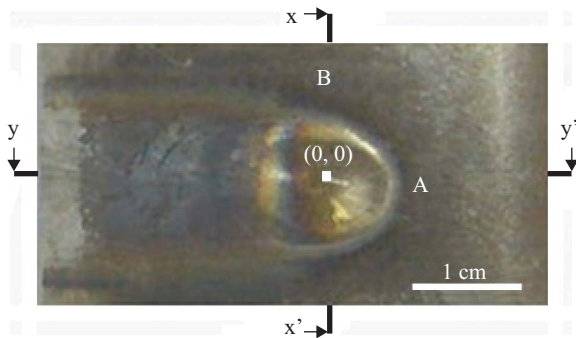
The top view of heated workpiece with 1 mm/s under incident power 6.8 kw applied.
